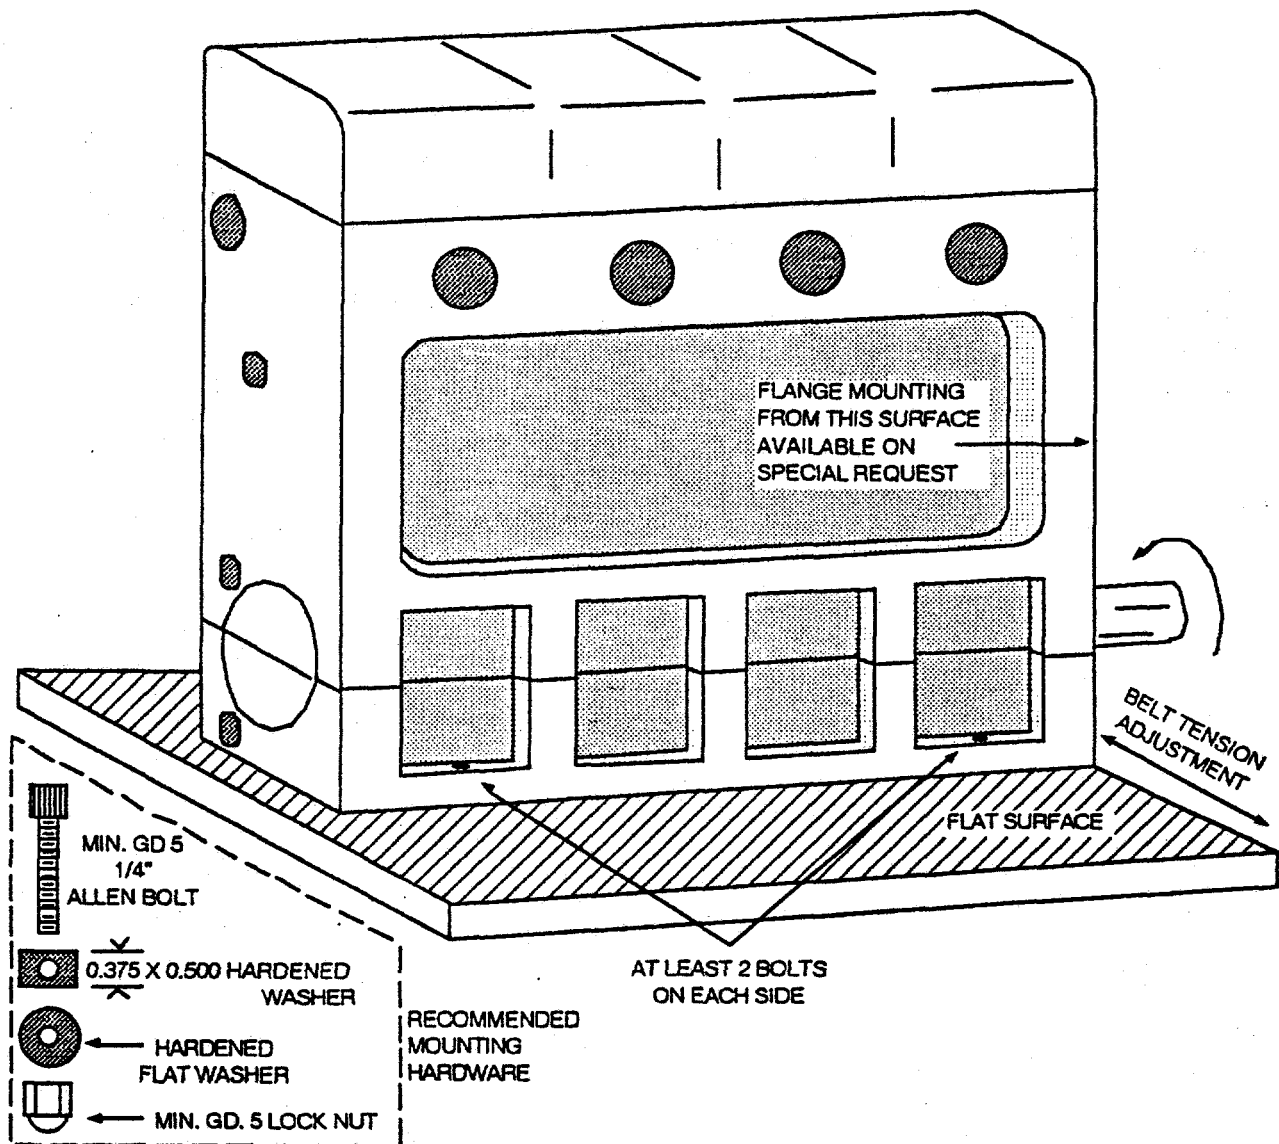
Generic mounting arrangement for a timing belt driven CVI. The brackets and tensioning mechanism (not shown) must be stiff enough to prevent vibration.
